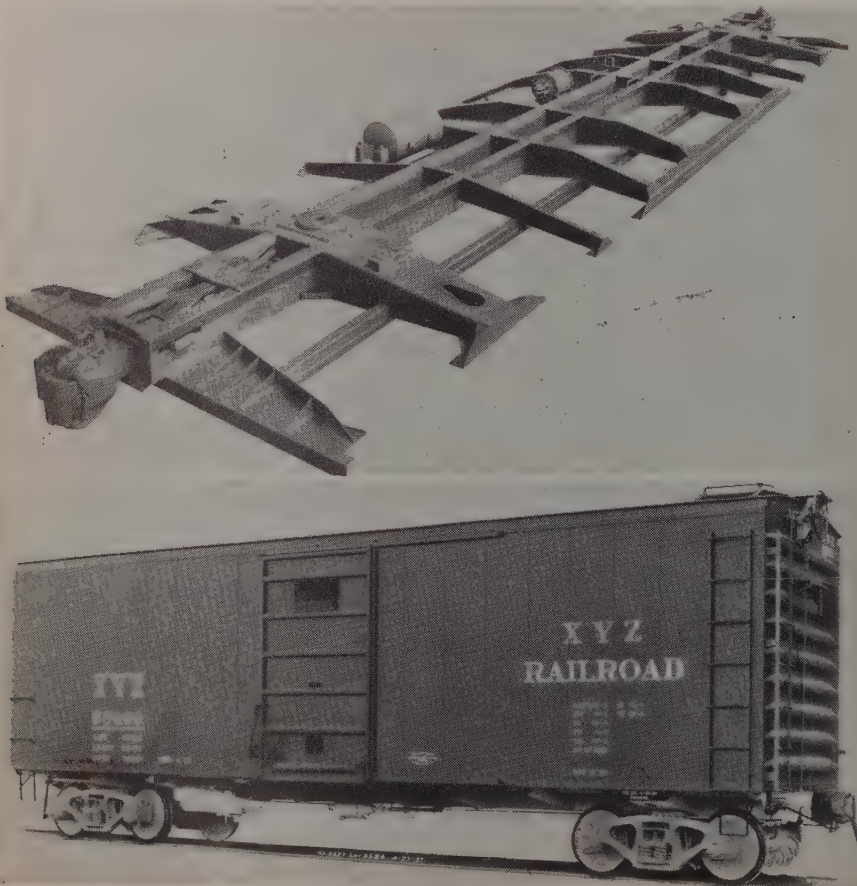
(Upper)—Bottom view of underframe, the backbone of the car, is formed by welding together special Z-bars of modified open-hearth steel. Cross bearers are high-tensile low-alloy steel. Fig. 2. (Lower)—Completed box car of high tensile low-alloy steel weighs 4½ tons less than unwelded construction using mild steel
